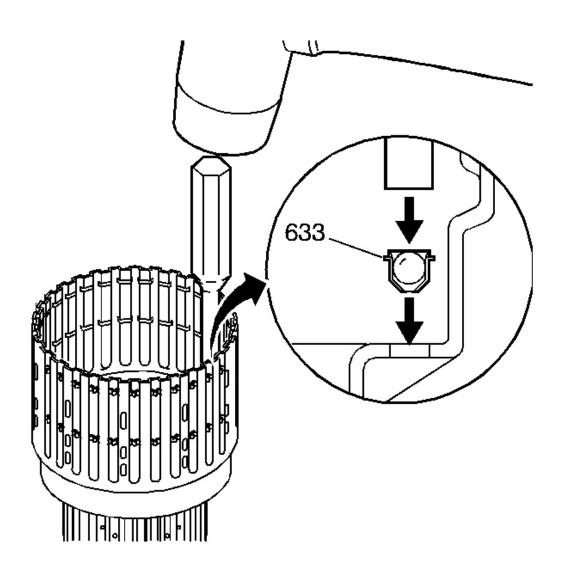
Inserting Input Clutch Housing Ball Check Valve Courtesy of GENERAL MOTORS CORP.
